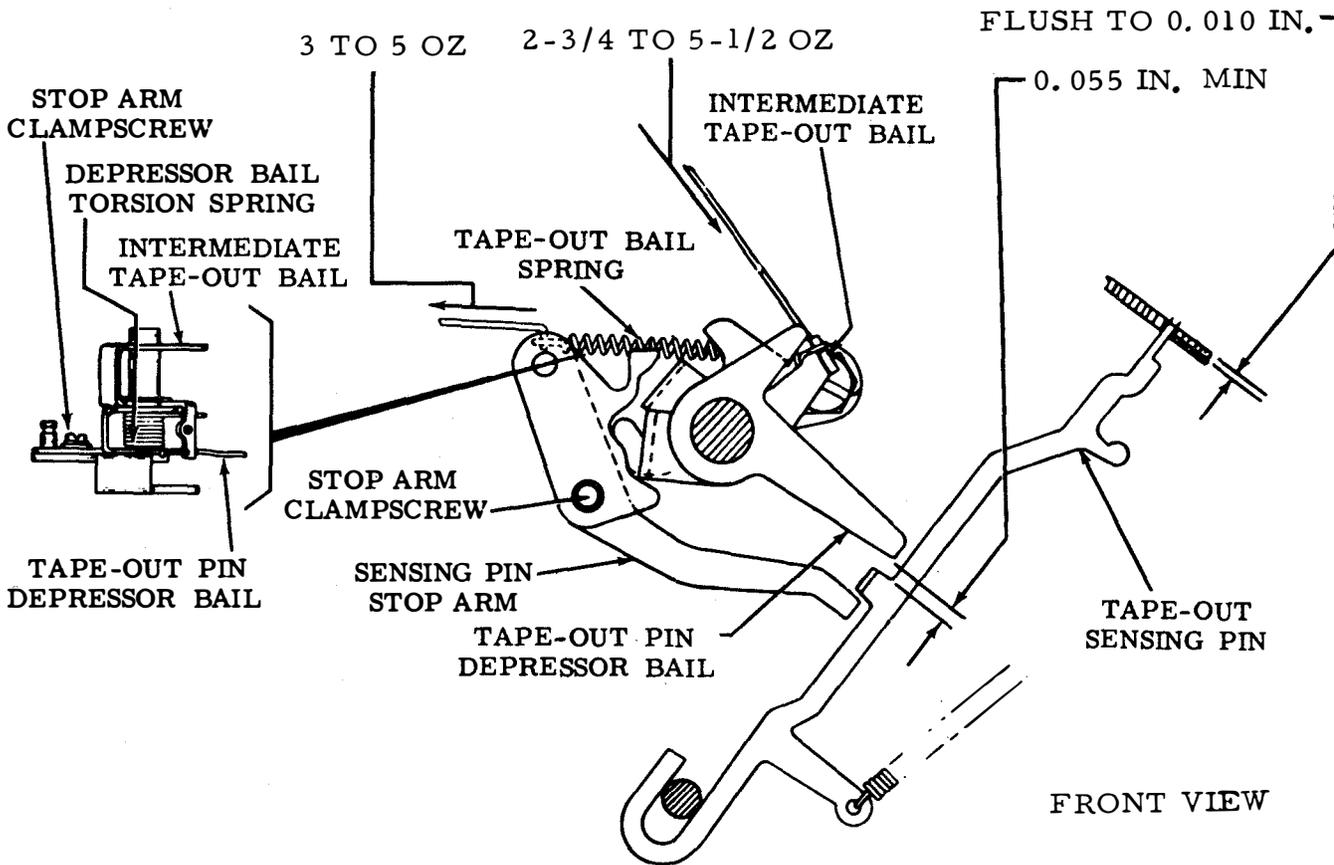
Tape-Out Sensing Pin, Depressor Bail Torsion Spring, and Intermediate Tape-Out Bail Spring
